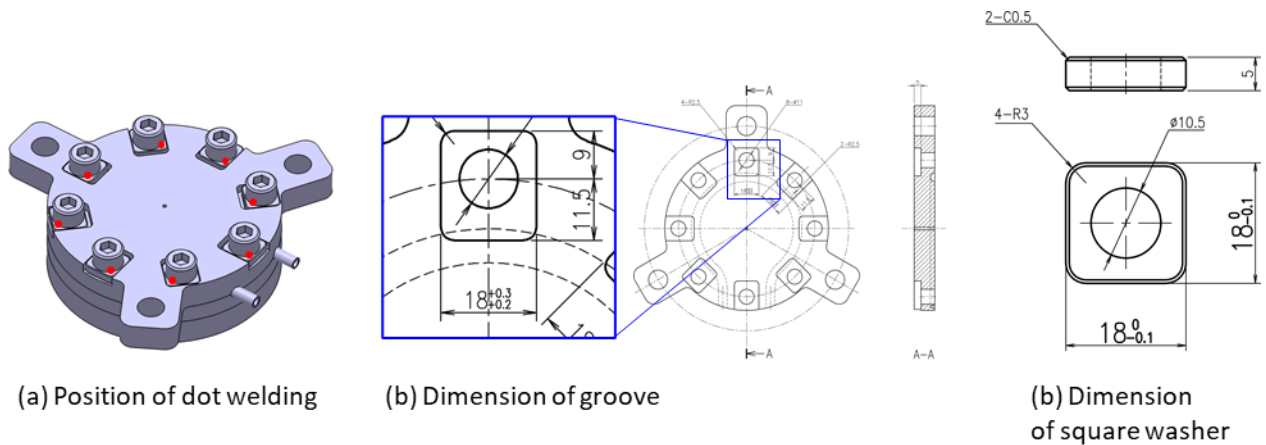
Mechanism of how to avoid the loosening of the bolt that is used to fix the tungsten mirror. The square chamfered washer can move in the radial direction of the mirror, but cannot rotate.
